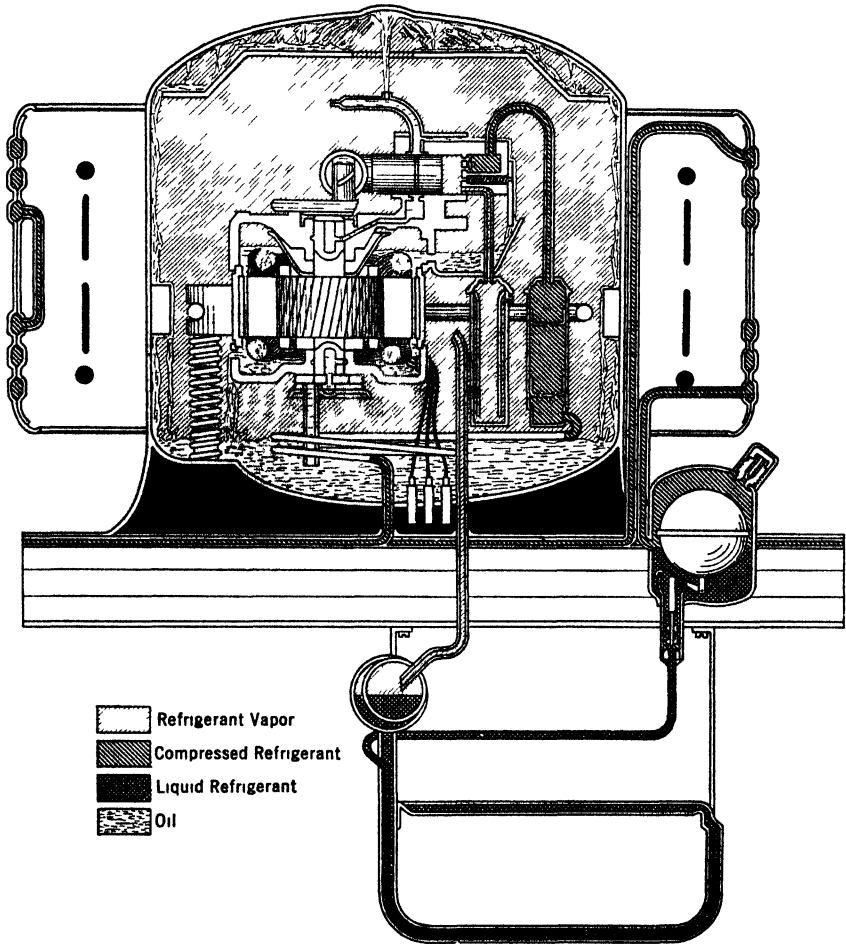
The hermetically sealed type of household refrigerating machine.
